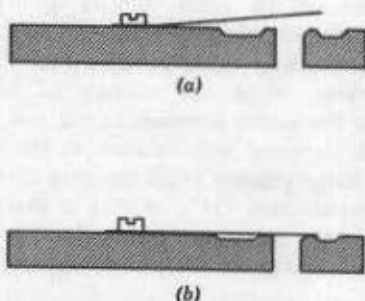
Flapper-type flexing valve. (a) Port open. (b) Port closed.
